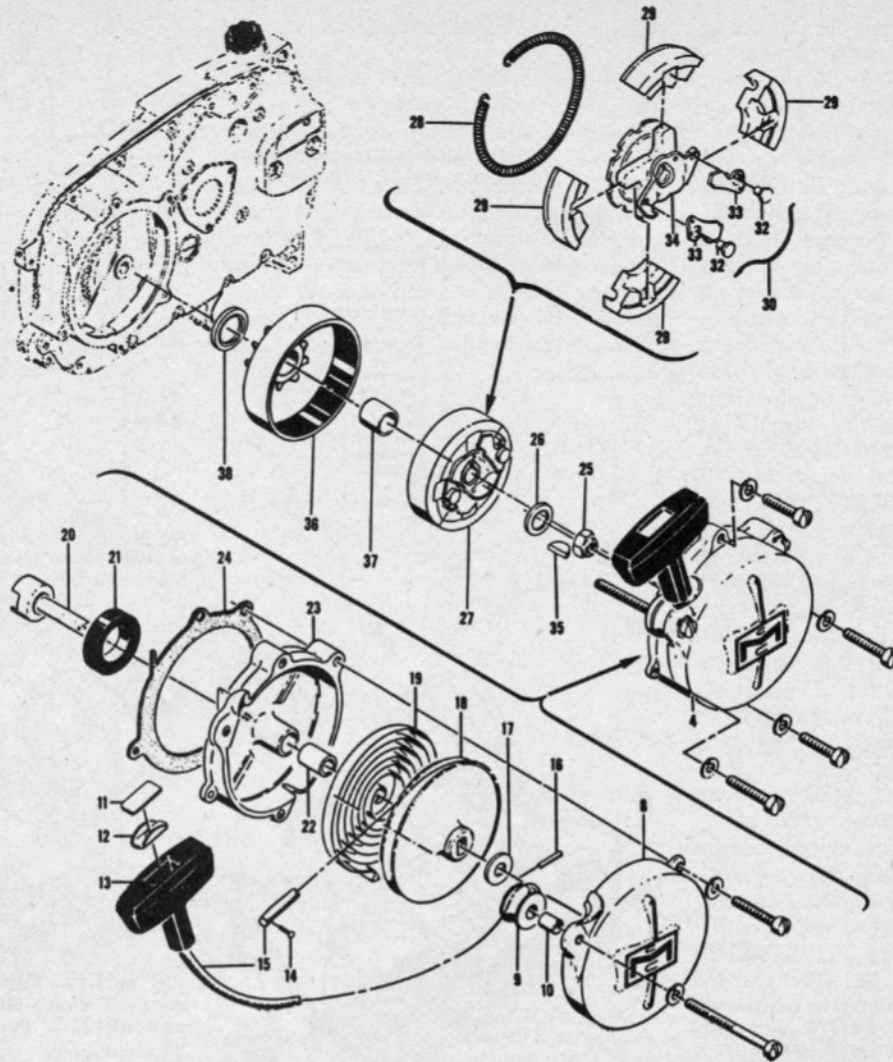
Starter and clutch assemblies used on models 640, 840, 890, 895 and 895C.
